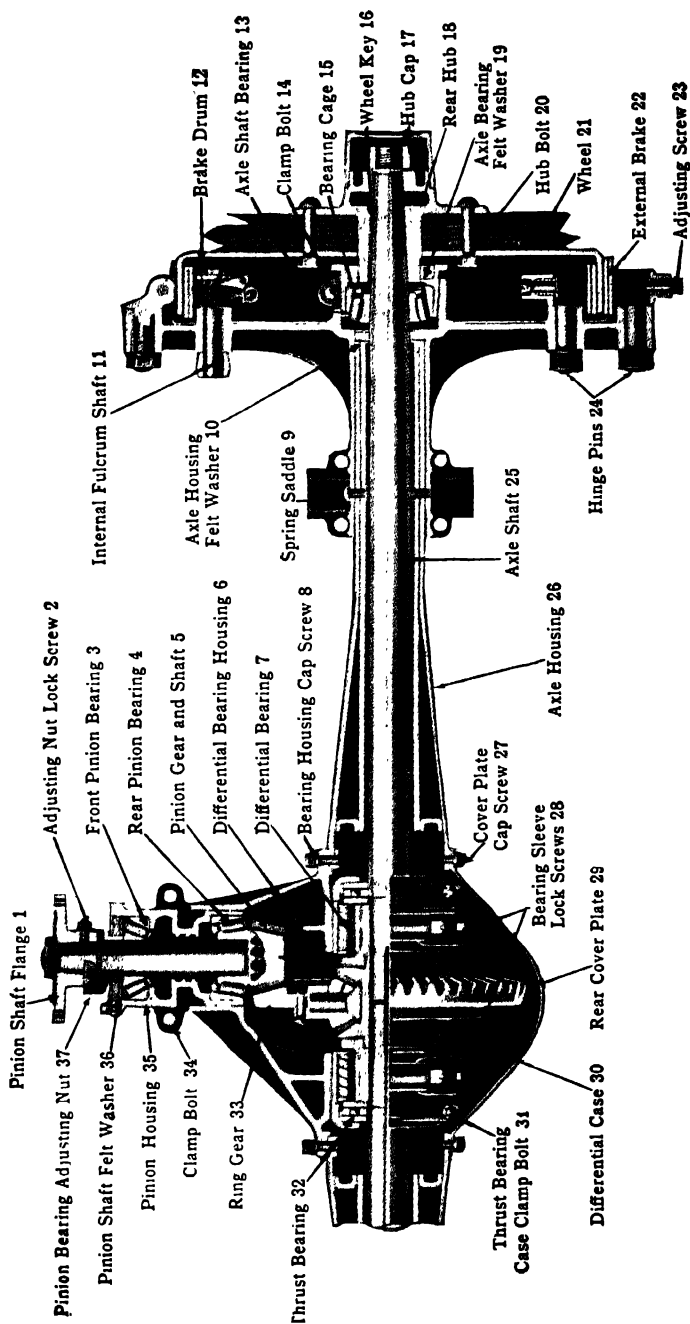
Typical Rear Axle Showing Location of Bearing Adjustments.
